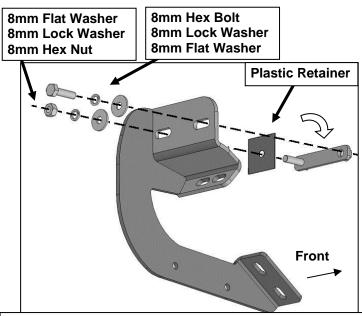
Use the loose Hex Bolt as a handle. Insert the Bolt Plate into the oval hole and feed the threaded end out either factory hex shaped hole. IMPORTANT: Do not let go of the hex bolt until after Plastic Retainer has been threaded onto bolt (Fig 5)
